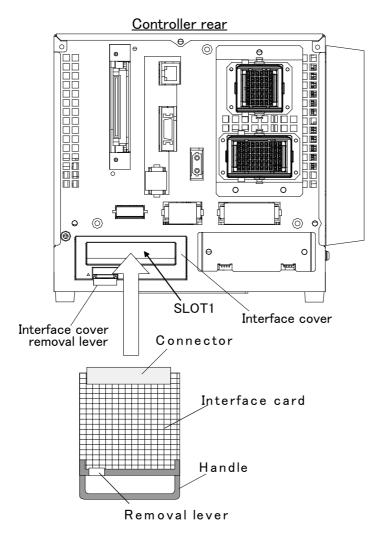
Mounting of the 2D-TZ535 card (CR1D controller)
